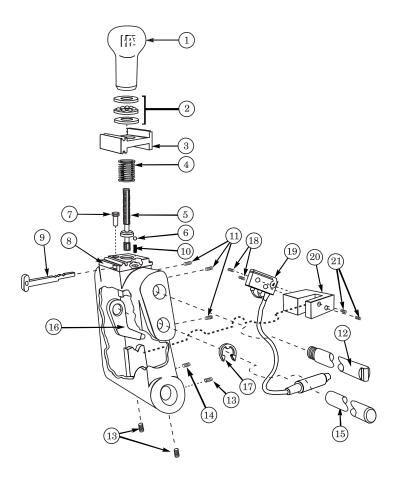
Fig. A: Pivot Arm with Safety Switch Assembly Parts List
